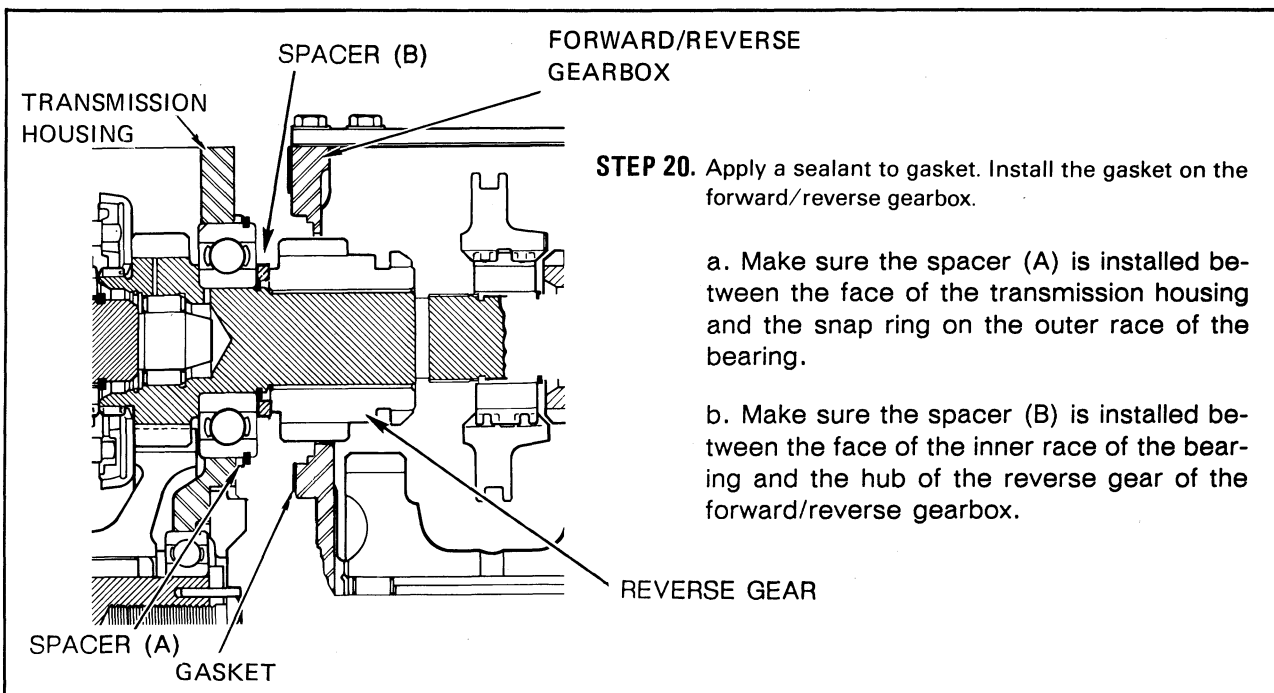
ASSEMBLY OF THE TRANSMISSION (Sheet 6 of 6)
